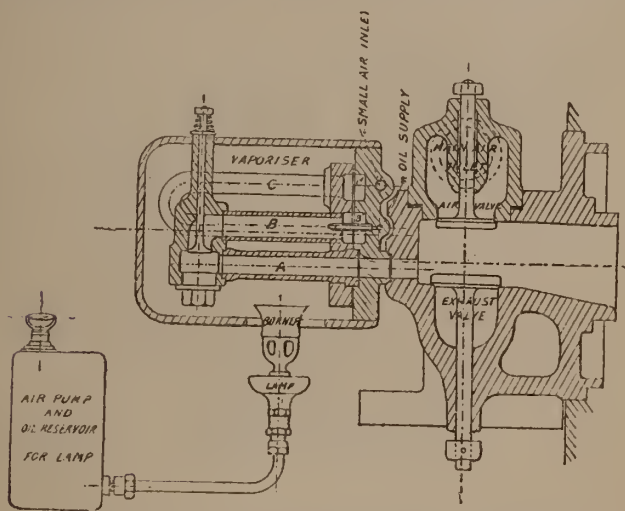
Section through vaporiser and valves of Fielding & Platt's Oil Engine.
